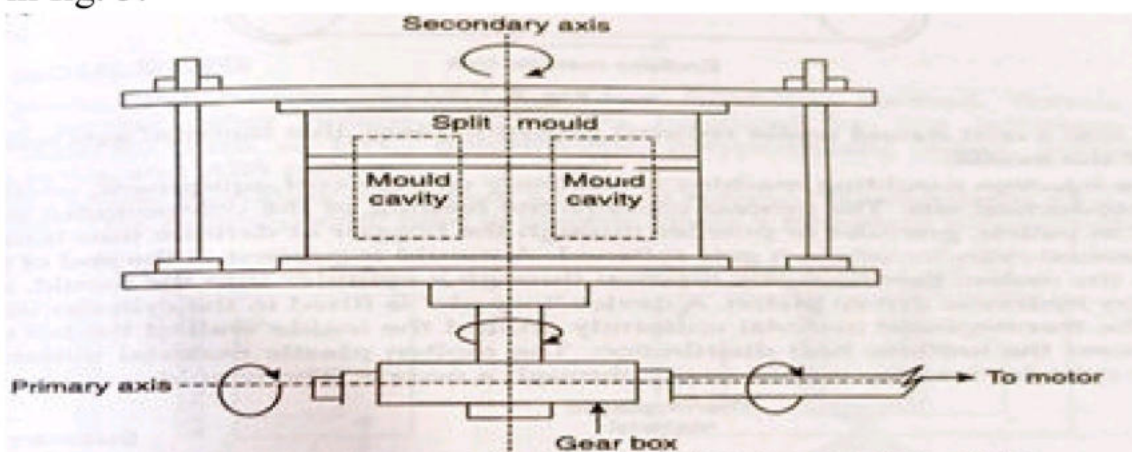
Apparatus for rotational casting showing hollow moulds, alongwith primary and secondary axis.
